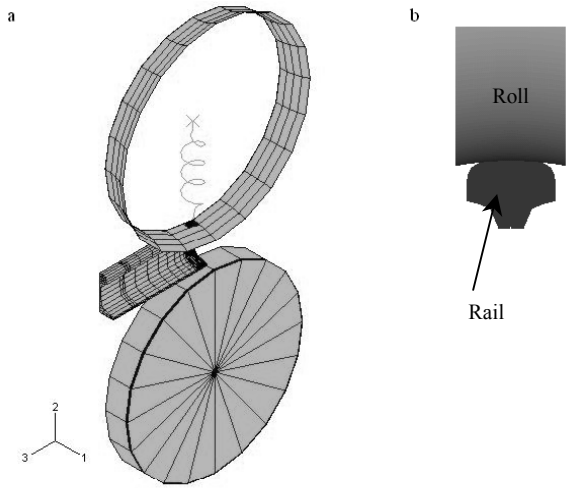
a) Isometric view of model with top and bottom roller. b) Schematic showing the shape of the roller surface.
